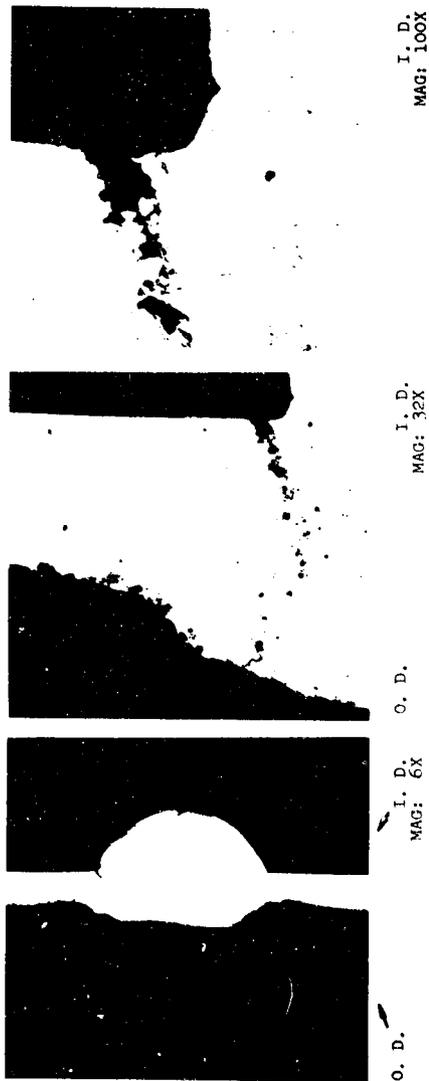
Cross Sections of Corrosion Leak Occurring at Edge-of-Weld in the 6061 Aluminum Inlet Tube of 2024 Aluminum Alloy Tank No. 1 (S/M9) used to Store ClF_5 Propellant for Eight Months
